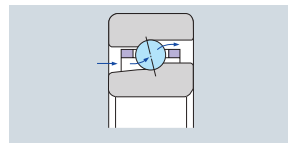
Ultra-high-speed angular contact ball bearings
